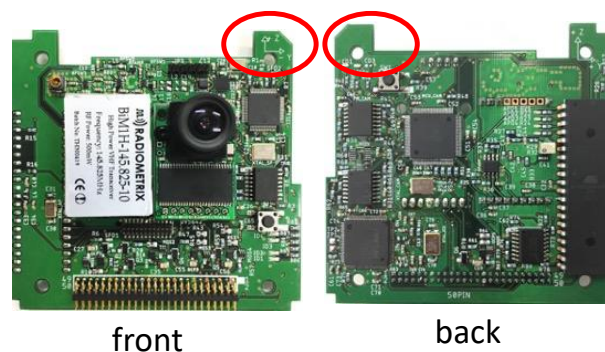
Design not to mistake the front and back of the PCB. The diagonal notch marked with a red circle should be on the right side when facing the front.
